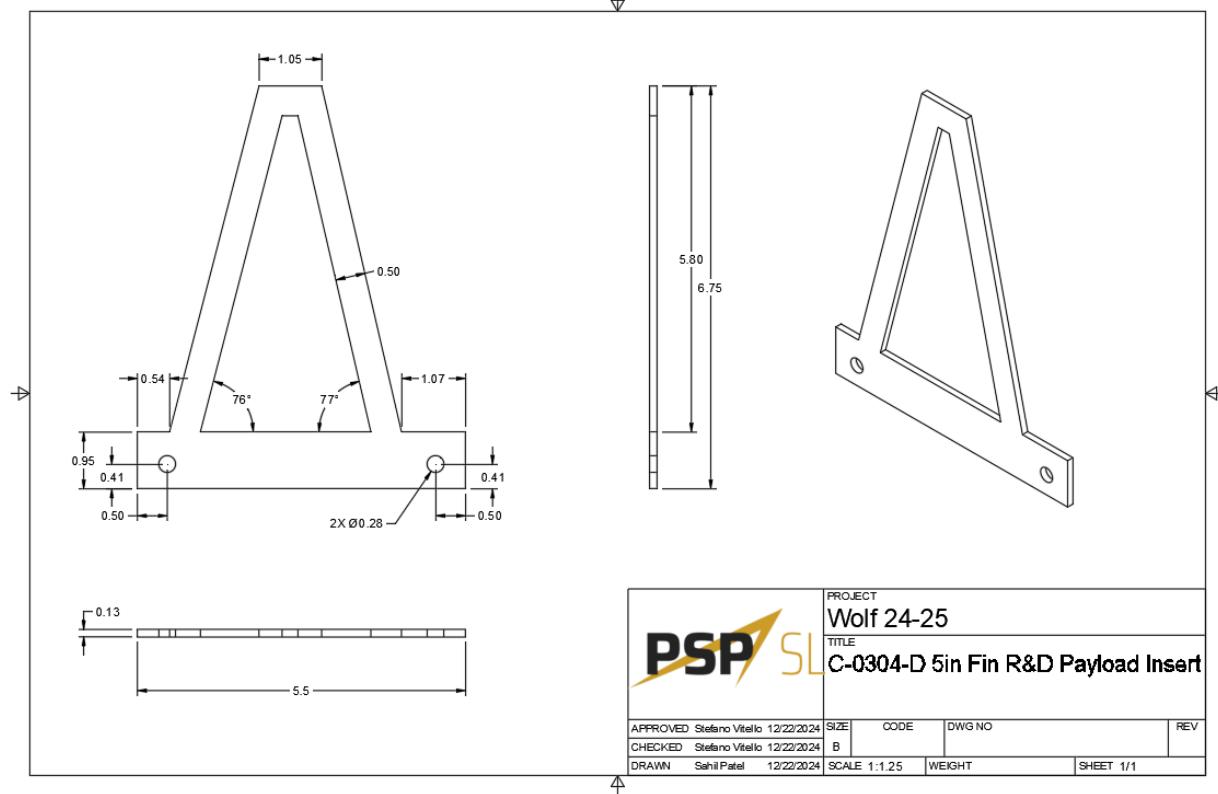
5in Fin Insert Technical Drawings
